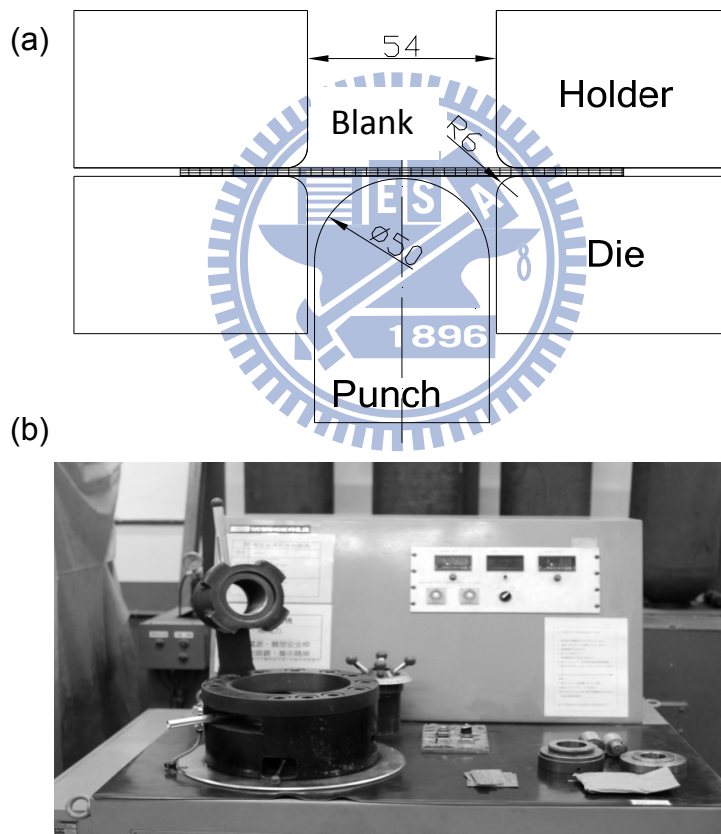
(a) Tooling dimension; (b) 50 ton universal material test machine
